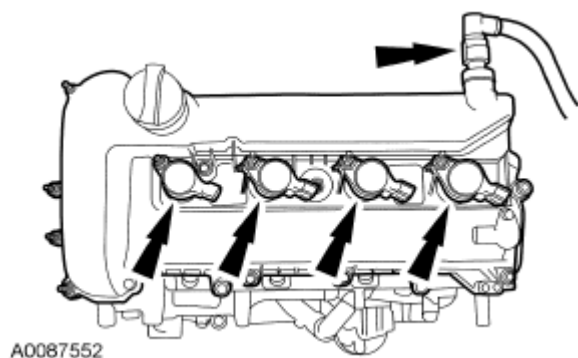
Locating Crankcase Vent Tube & Coil-On-Plugs
